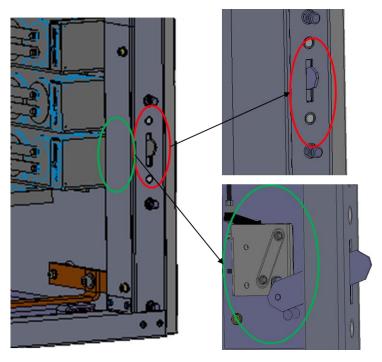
FLCB panel detailing electromechanical locking mechanism used to implement the interlock and prevent opening when conditions are unsafe
